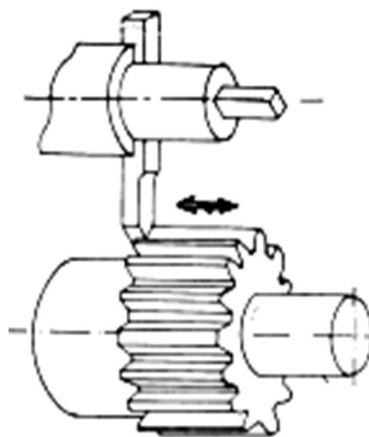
Gear teeth cutting in ordinary shaping machine [6]
